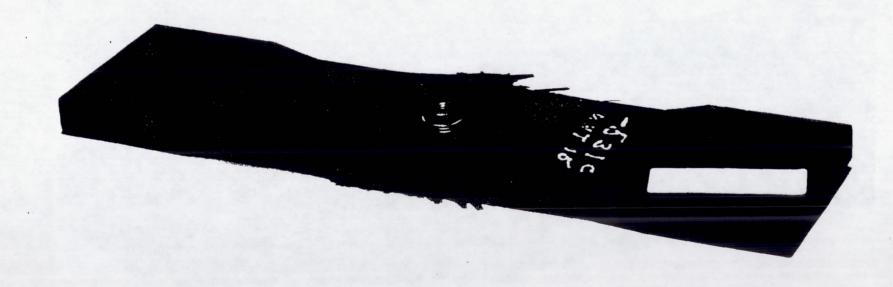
UNLOADED HOLE TENSION TEST - NET-SECTION FAILURE
